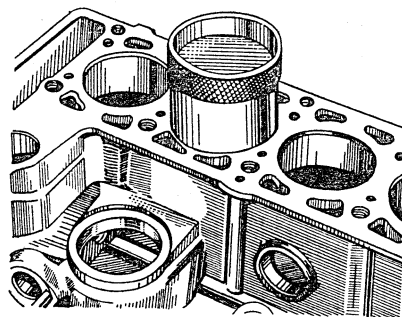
Installing the Piston with Rings into Cylinder with Piston Inserter from Set 02.7854.9500
